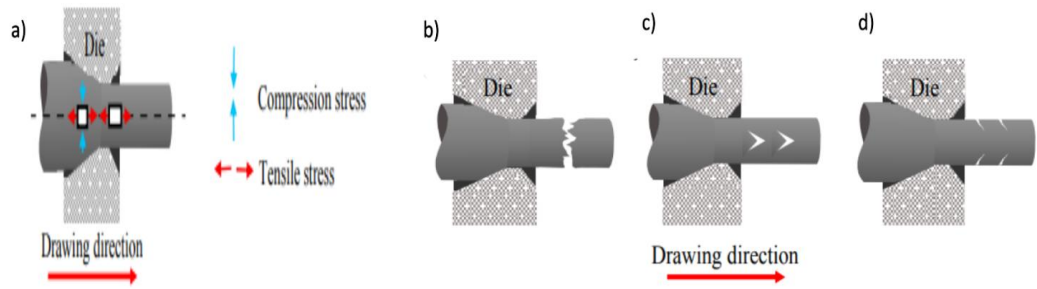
During cold drawing: (a) Occurrence of stresses; (b) Wire break; (c) Internal Crack; (d) Surface Crack (64).
